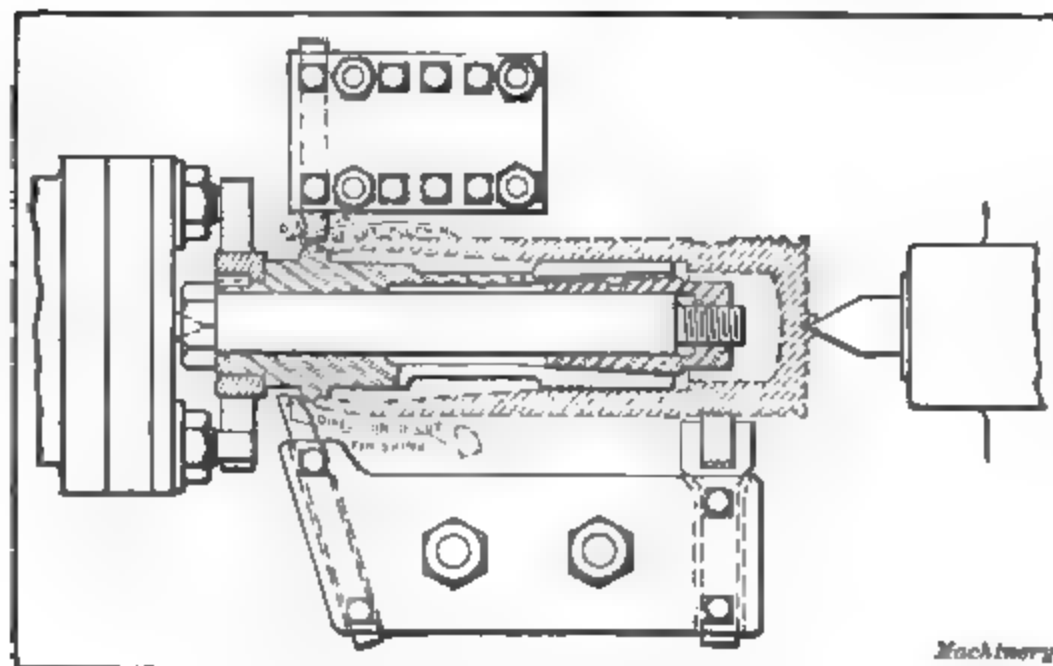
Tool Arrangement for turning Shrapnel Shell Point and knurling Groove at Closed End
